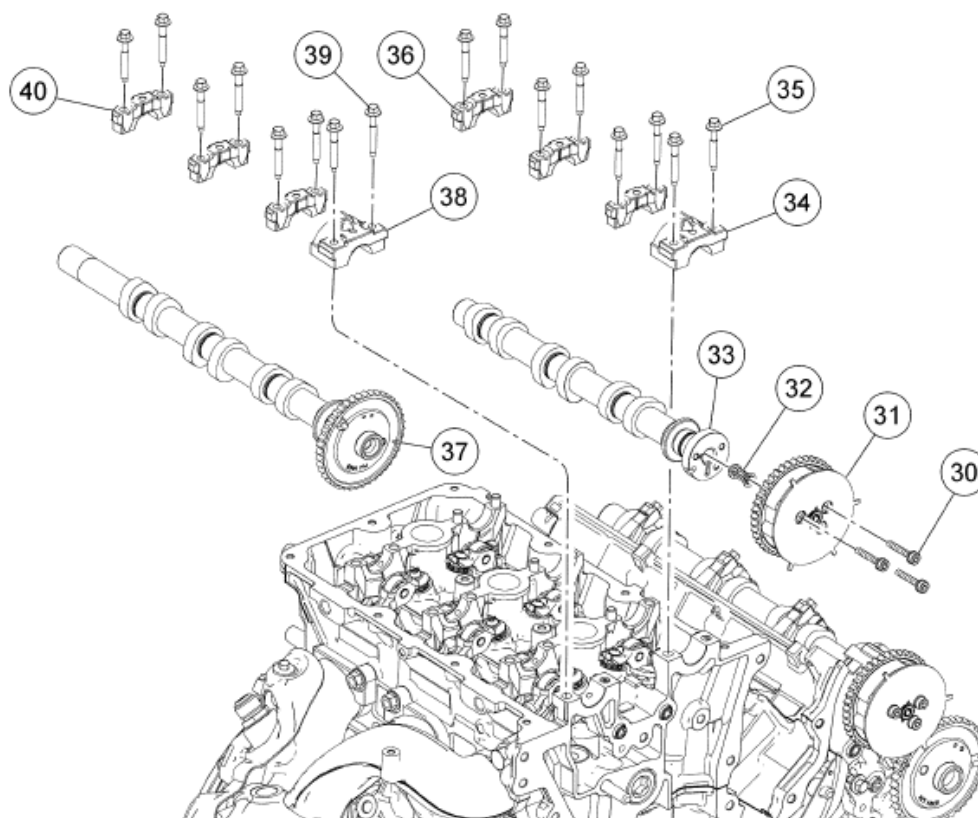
Exploded View Of RH Side Intake And Exhaust Camshaft
